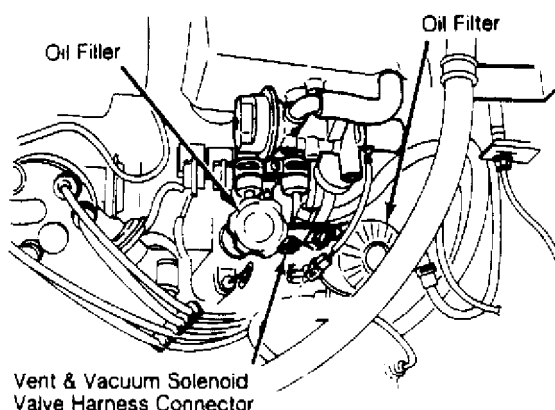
Vent and Vacuum Solenoid Harness Connector
